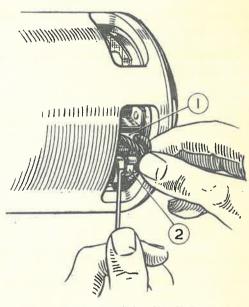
Checking brushgear 1 Brush 2 Brush Spring
